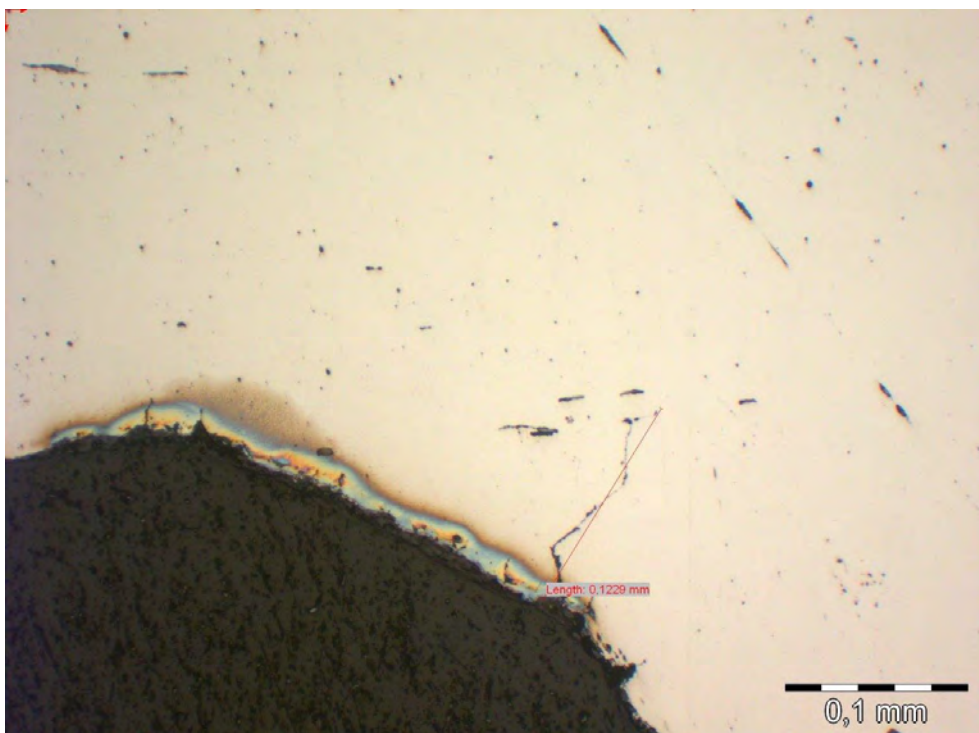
Cut five in crack at segment A, second ridge on barrel no. 14389
